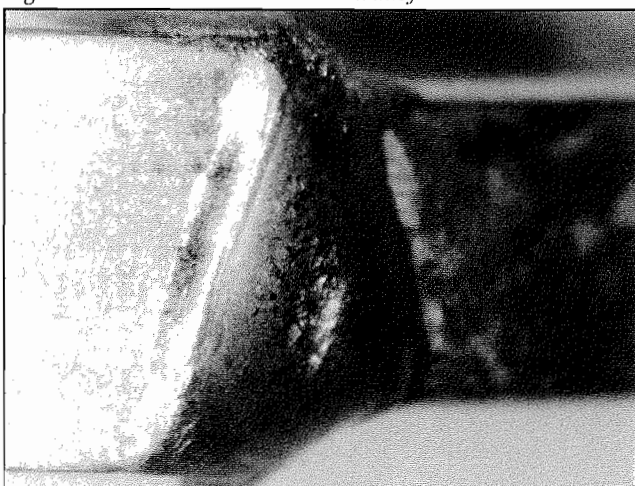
Fusion weld in resized Pt-Co alloy
